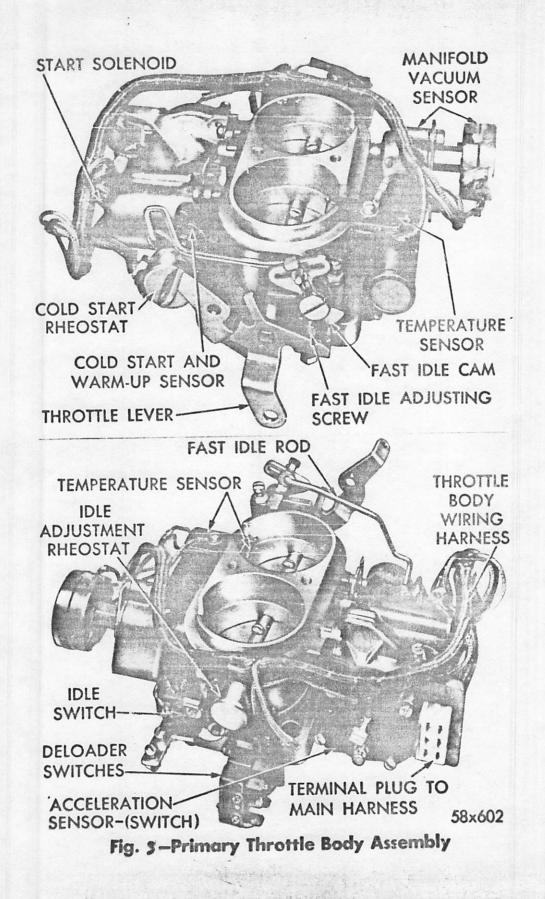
PRIMARY THROTTLE BODY AND SENSORS
